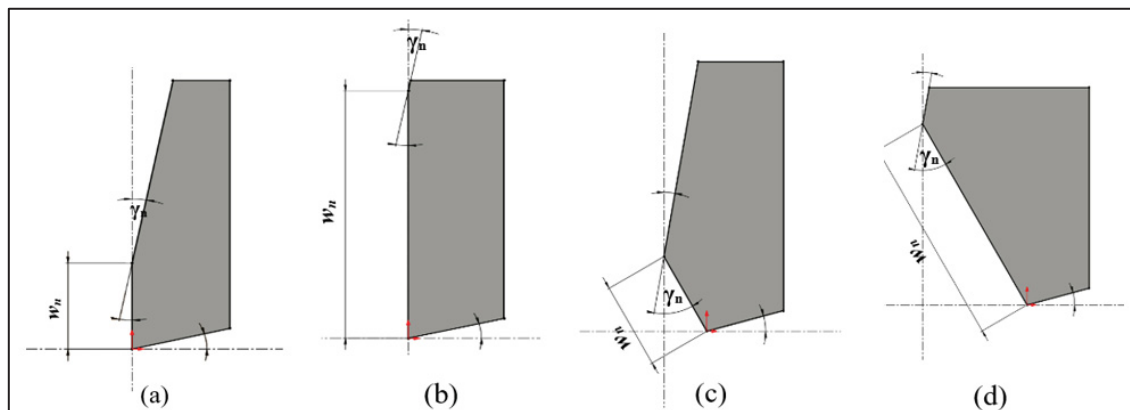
Chamfer cutting tool geometries with different chamfer width and angles
